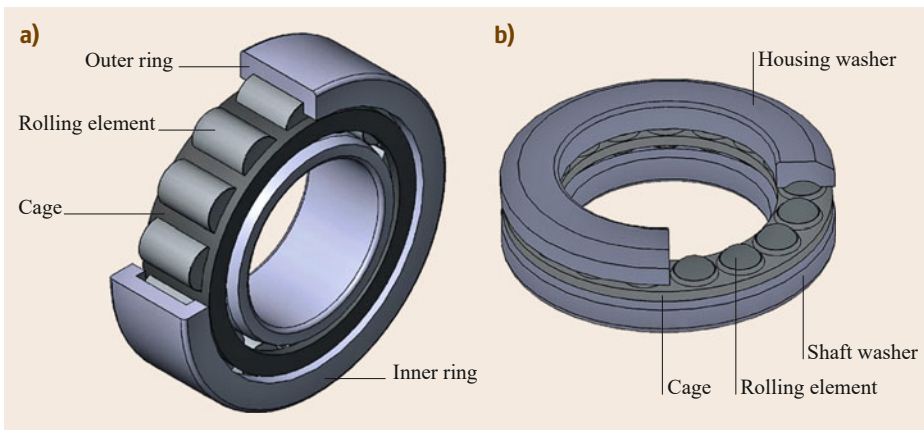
,b Basic structure of a rolling bearing according to ISO 5593. (a) Radial bearing and (b) thrust bearing
